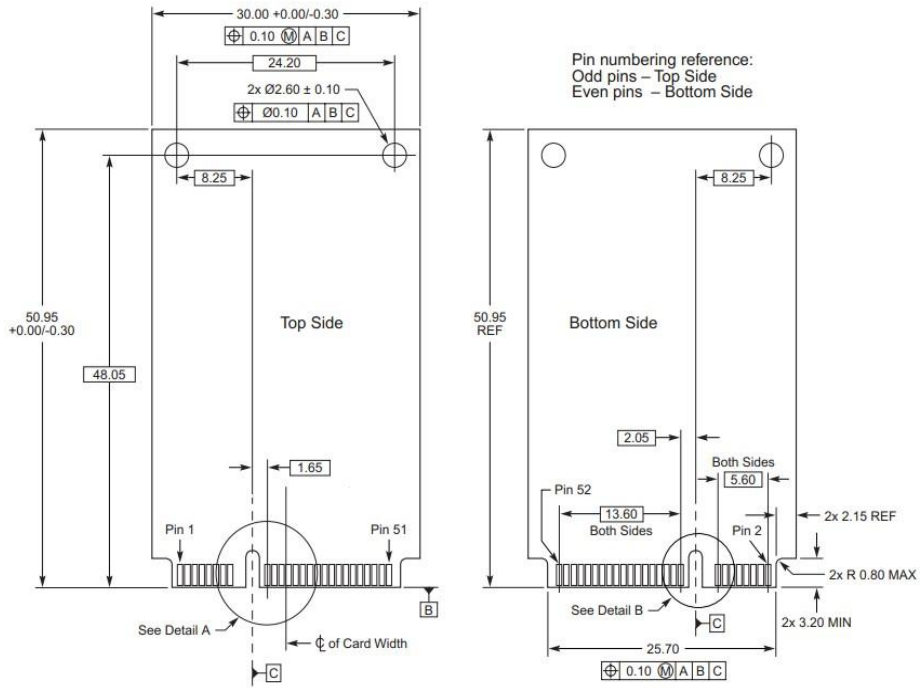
Standard Dimension of Mini PCI Express (Unit: mm)
